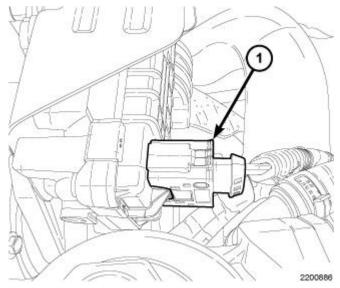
Turbocharger Module Connector Courtesy of CHRYSLER LLC
